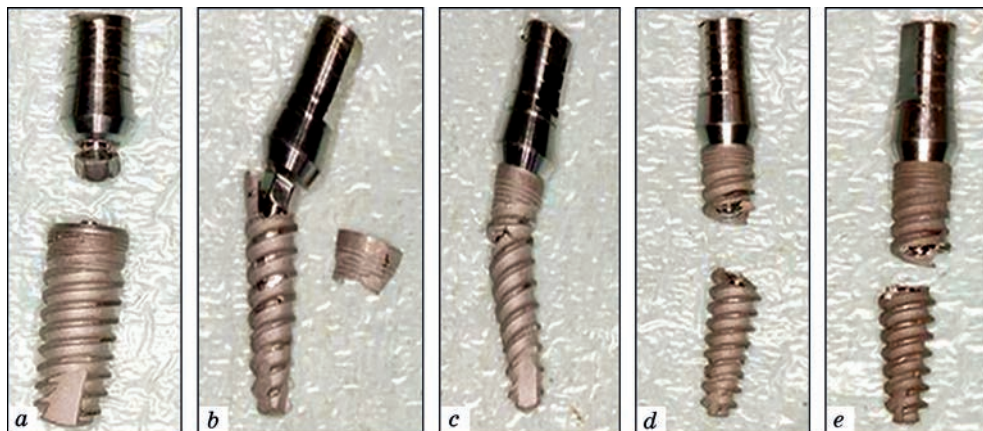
The four modes of fracture: (a) 5-mm specimen broken on the screw and abutment neck; (b) 3.75-mm specimen broken on the implant neck; (c) 3.75-mm specimen broken on the implant second thread; (d) 3.3-mm specimen broken on the implant second thread; (e) 3.3-mm specimen broken on the implant third thread [55]
